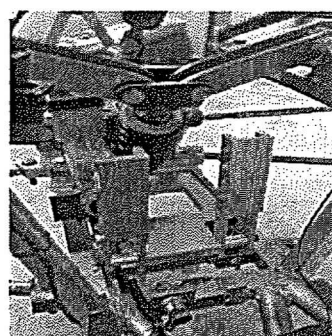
Fitting process of new pedal assembly to the UTeM Formula Varsity race car
